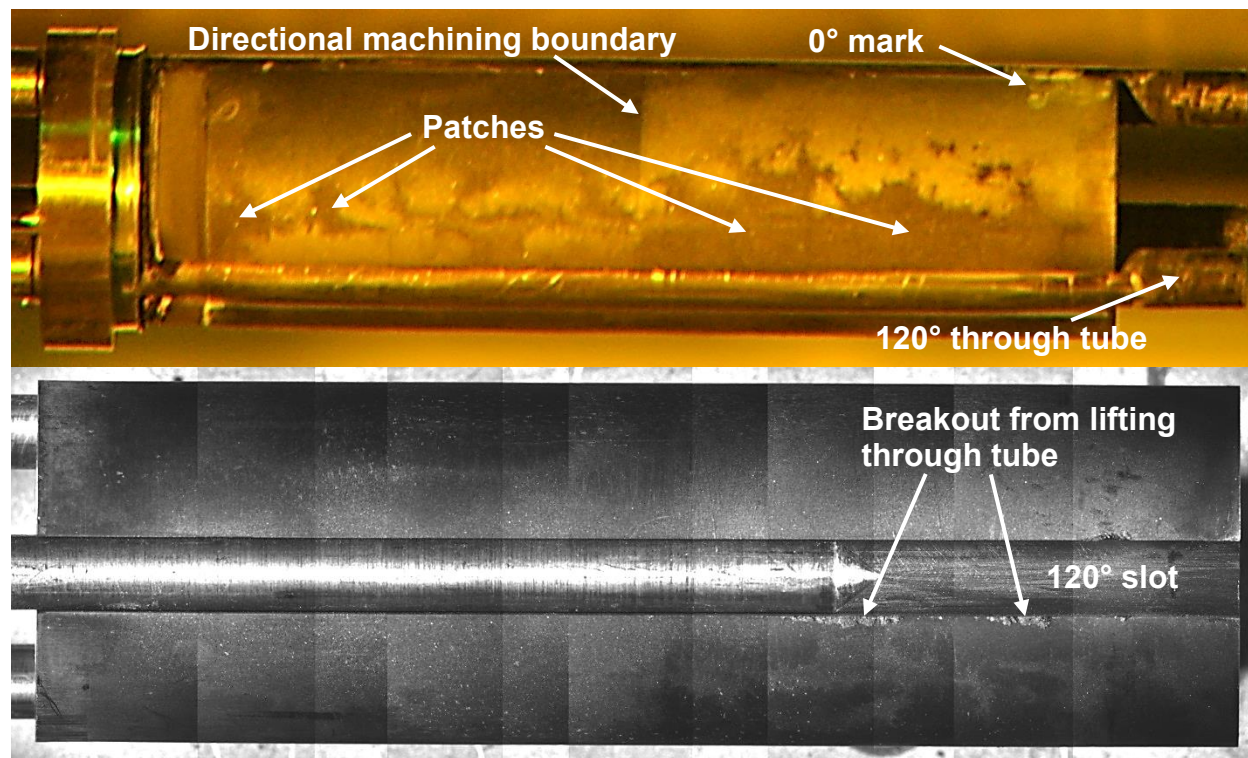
Holder 1 before separation from head assembly (top image, bottom end at right) and after head separation (bottom image, top end at right).
